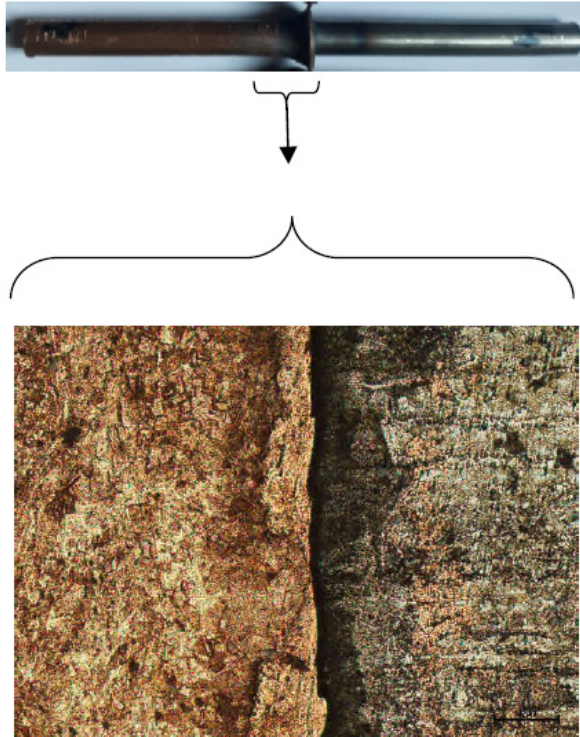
Friction welded piece of copper to steel with its microstructure.
